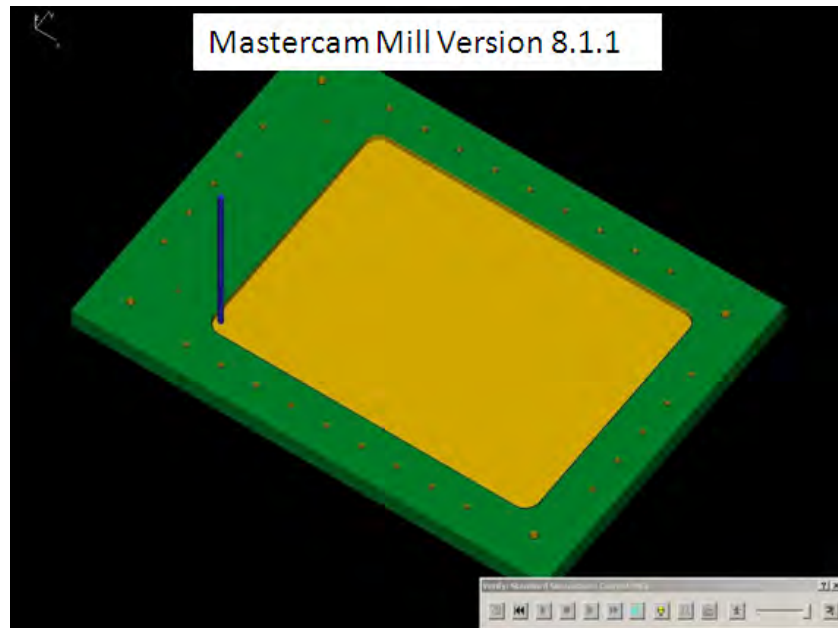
Mastercam toolpath for the top profile of the heat sink. MONTe Heat Sink Top.mc8
